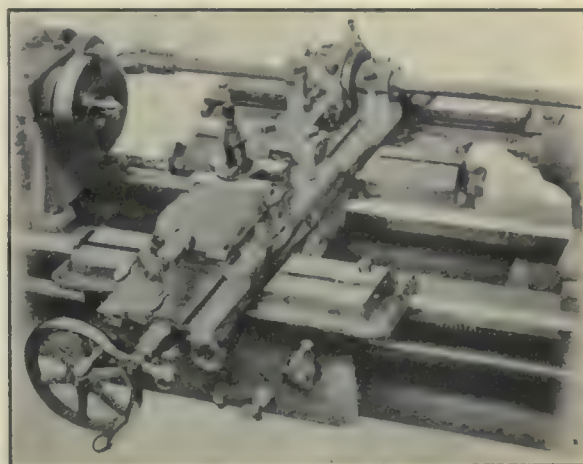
View of Lathe Fitted with Oval and Multi-lobe Turning and Boring Attachment, Showing Connection of Cross-slide with Eccentric.
